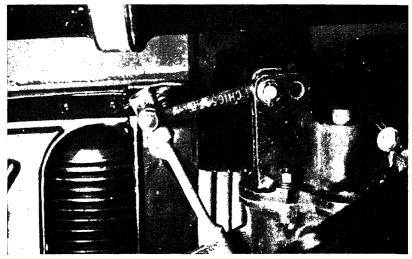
The mixture control on a.1.48, type e, and subsequent issue carburetters.
